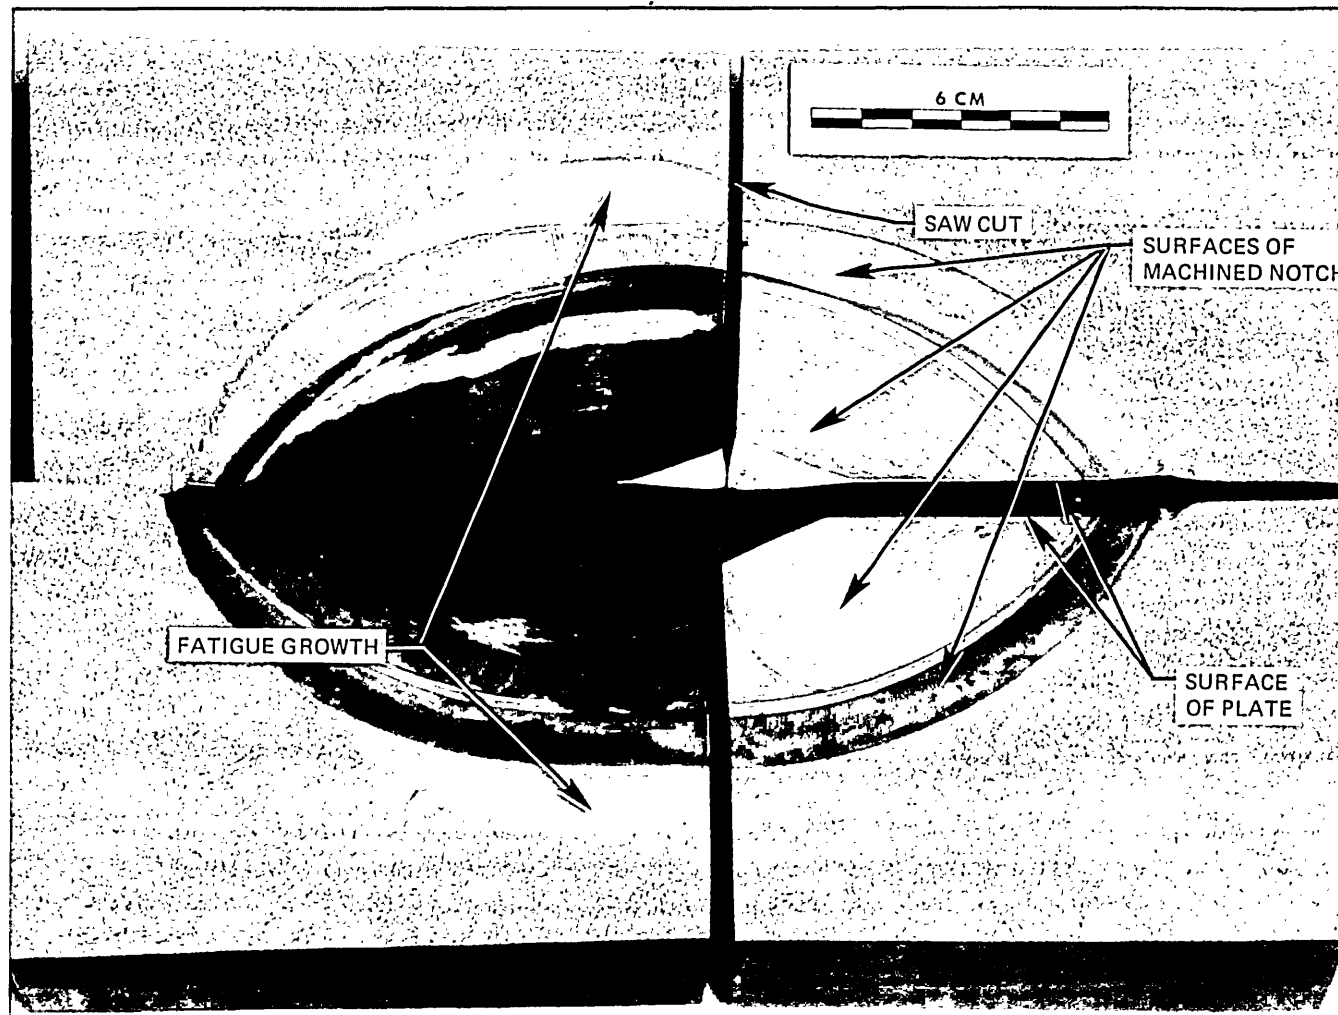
Fatigue crack growth in V-8A flawing practice piece in first trial.
